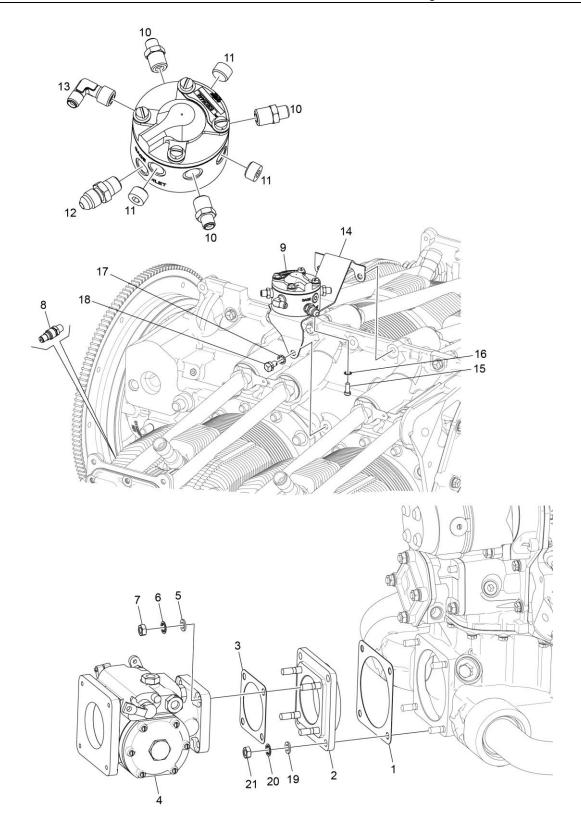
Fuel Injector, Fuel Manifold, and Injection Nozzles
